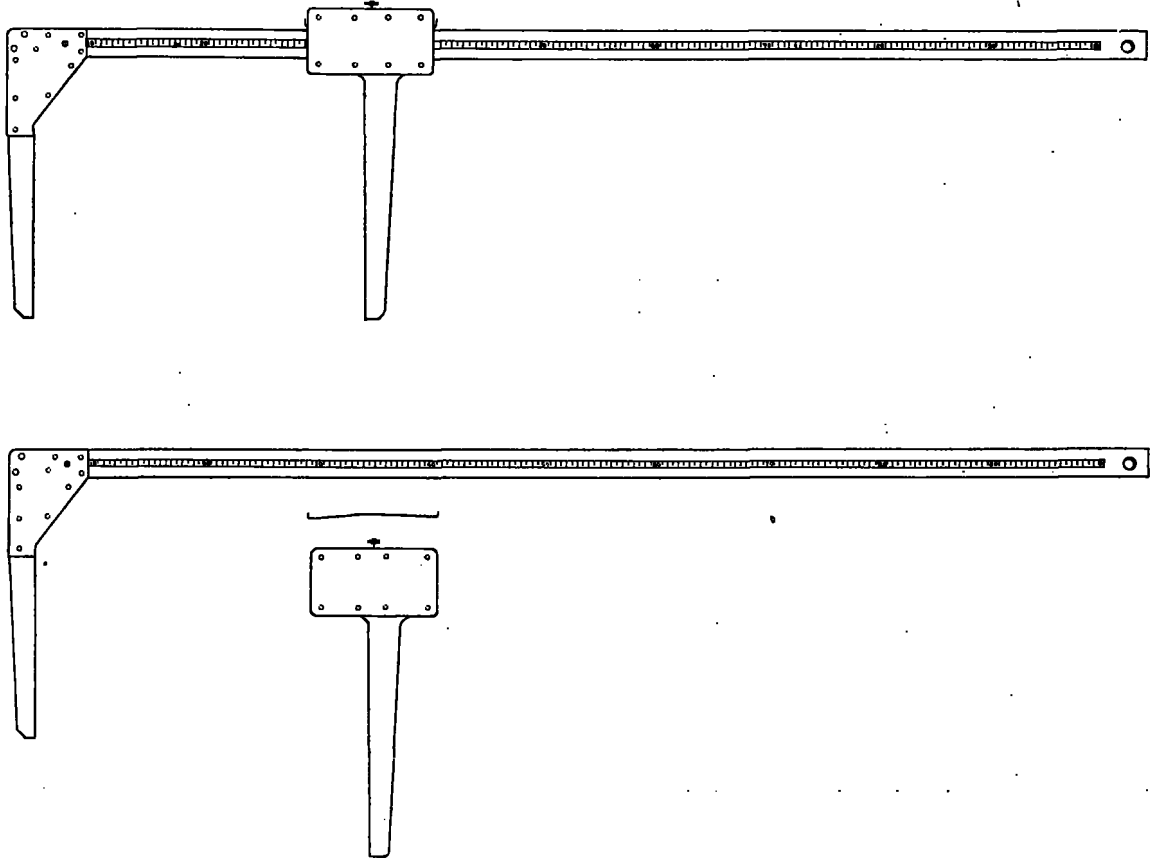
Calipers used in measuring tunas; above, assembled; below, unassembled.
